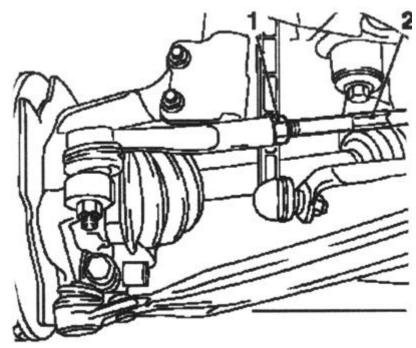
Adjusting the convergence of the front wheels: 1 - nuts, 2 - draft
